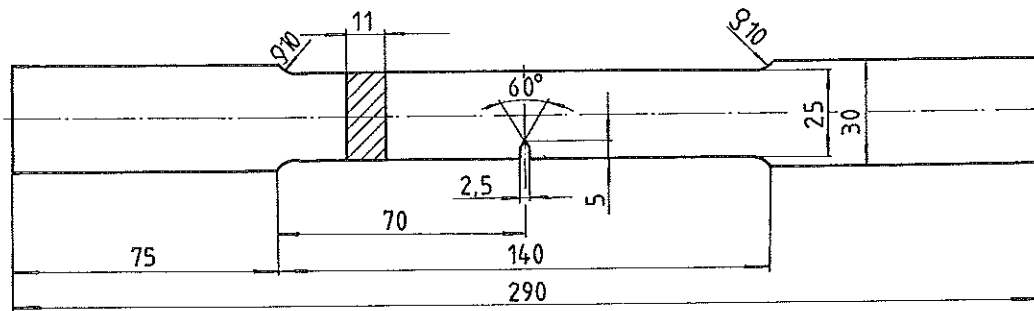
Three point bend specimen - SE (B) for fatigue crack growth analysis
